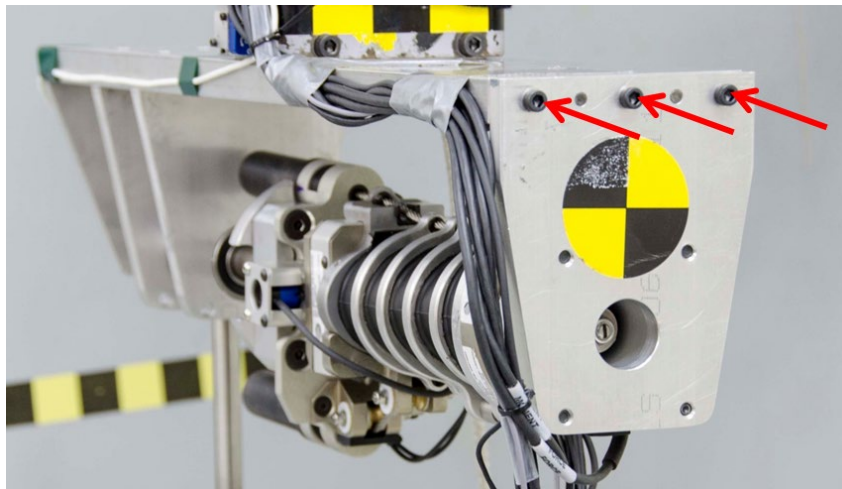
Attachment of end place to secure the neck into the torsion fixture.
